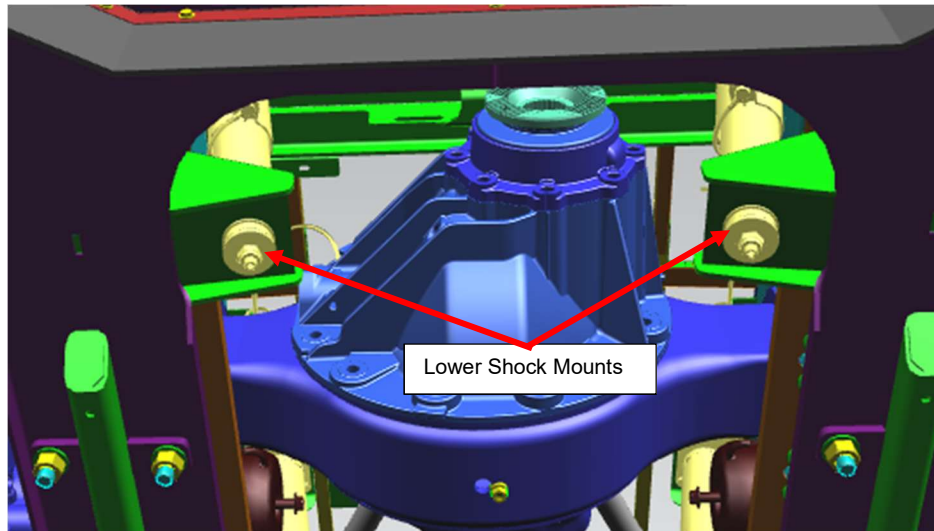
Rear Shock absorbers lower hardware (drive shaft removed for clarity).
